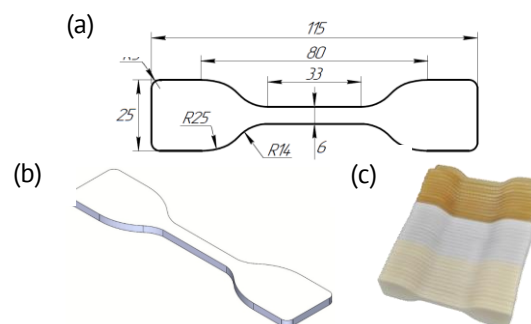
Specimens: (a) sketch with relevant dimensions in mm; (b) geometric model; (c) 3D-printed specimens
